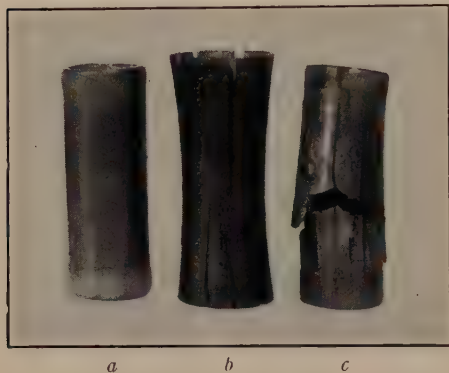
SPECIMENS FOR CORROSION CRACKING.
